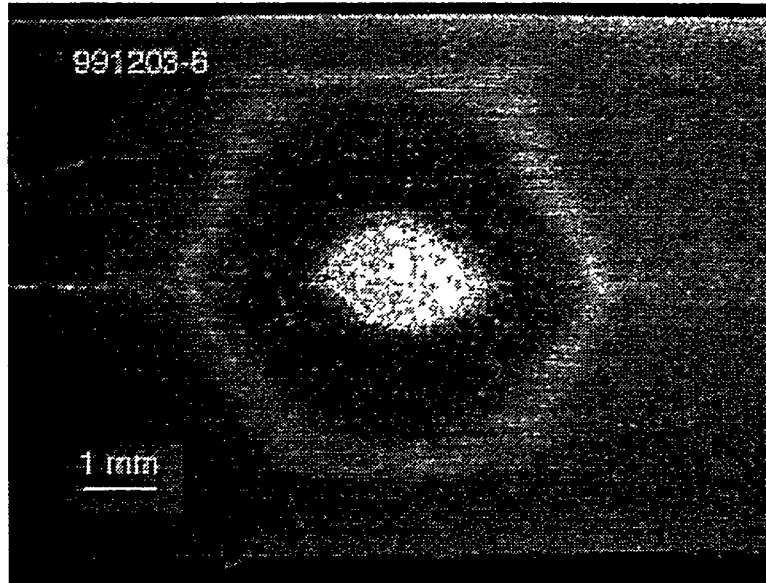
Cross sectional view of resistance weld of V-4Cr-4Ti alloy (Test No. 6 in Table 1) indicating small restructuring zone ( white area )
